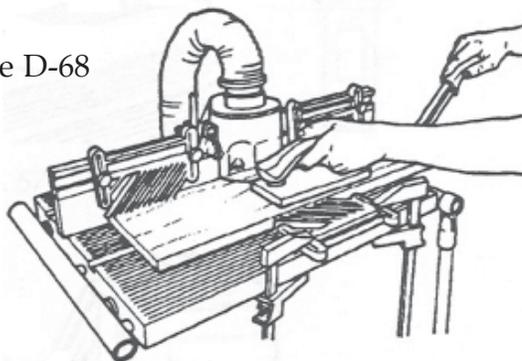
illustrates two feather boards mounted on a feather board holder. Since the workpiece is too wide to install a feather board in the miter gauge channel of the worktable, notice how the horizontal feather boards is clamped to the worktable. When you want to use feather boards for horizontal pressure on the workpiece, remove the channel guide from the feather boards and clamp the feather board to the front of the worktable.
